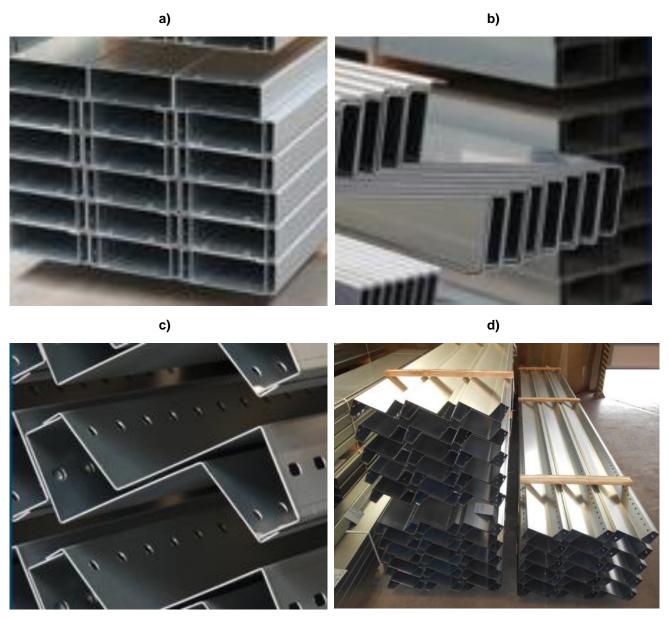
Examples of products and manufacturing capabilities: a) a closed profile of a rectangular cross-section, b) corners, c), d) a connector with a "z" cross-section with holes
